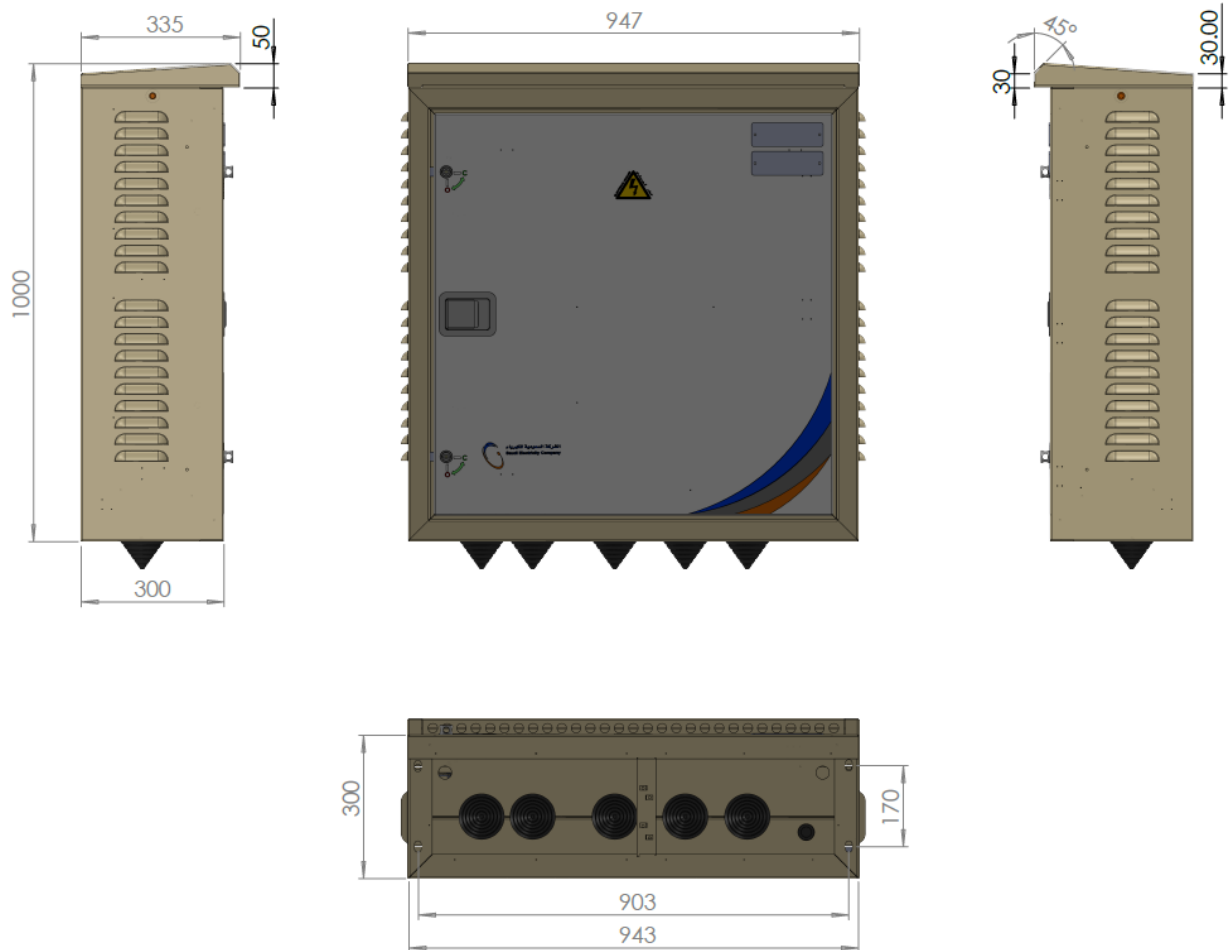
Perspective Drawing of the Service Cabinet Showing the Main Design Elements (External Features)
